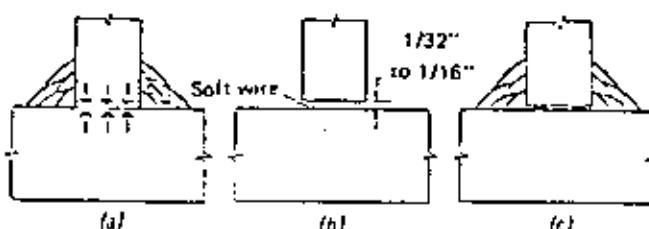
In a restrained joint in thick plates (a), all shrinkage stress must be taken up in the weld. Separating the plates with soft wires (b) allows the plates to move slightly during cooling. The wires flatten (c) and remove most of the stress from the weld metal.
